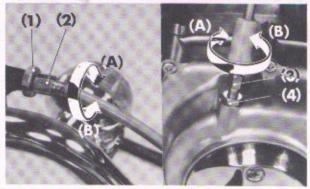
(1) Clutch cable upper adjuster lock nut
